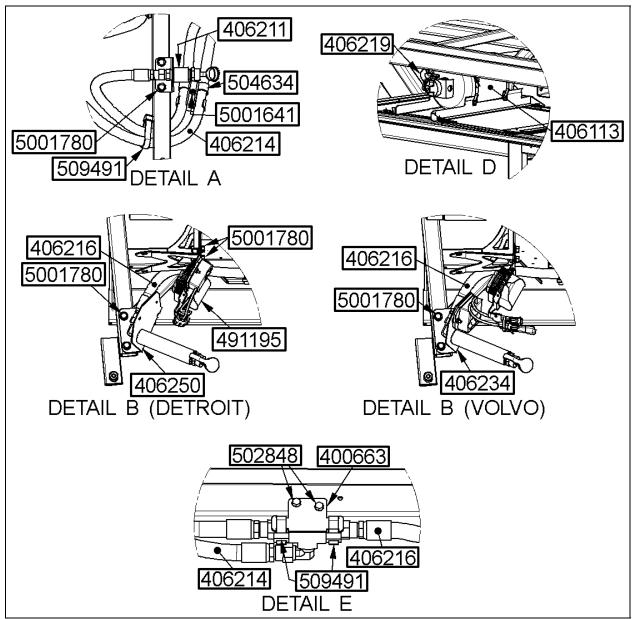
H3 COACHES NOZZLE BRACKETS AND COMPONENTS IDENTIFICATION AND INSTALLATION
